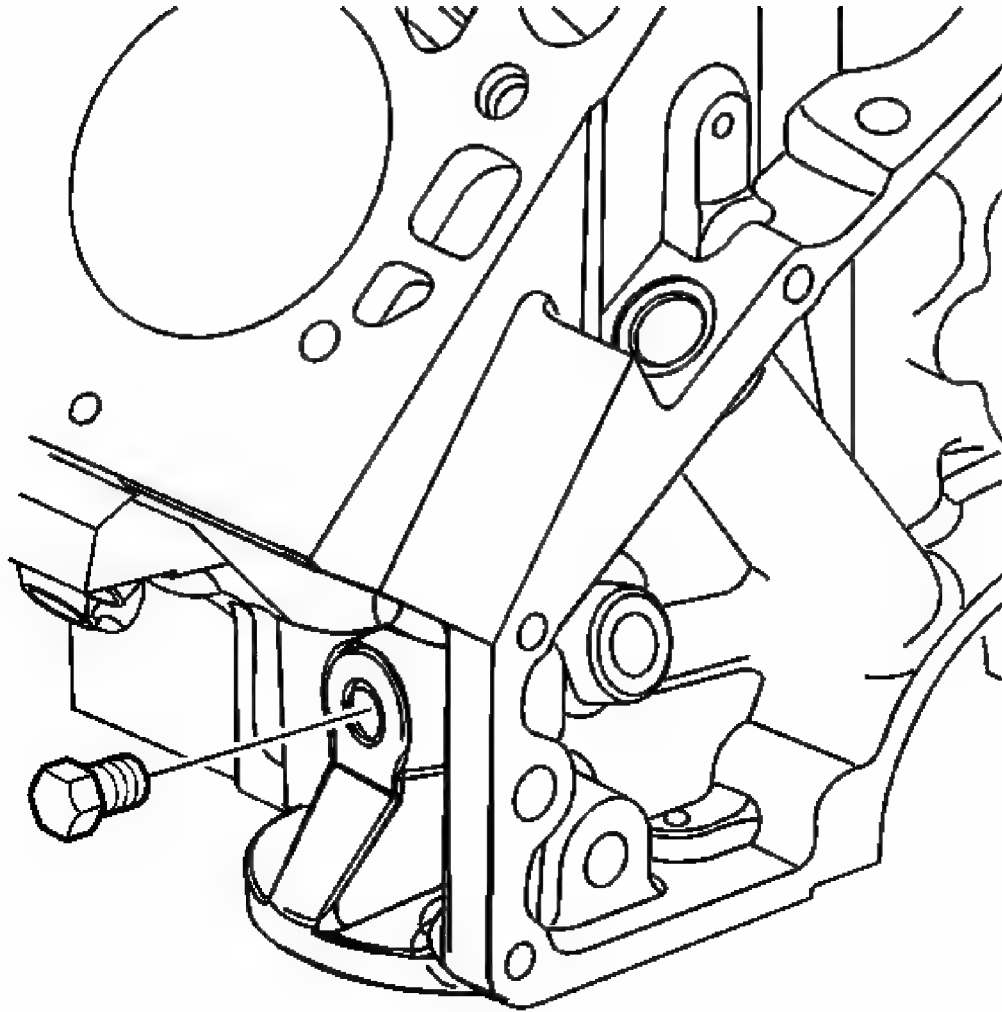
View Of Engine Block Left Oil Gallery Plug
